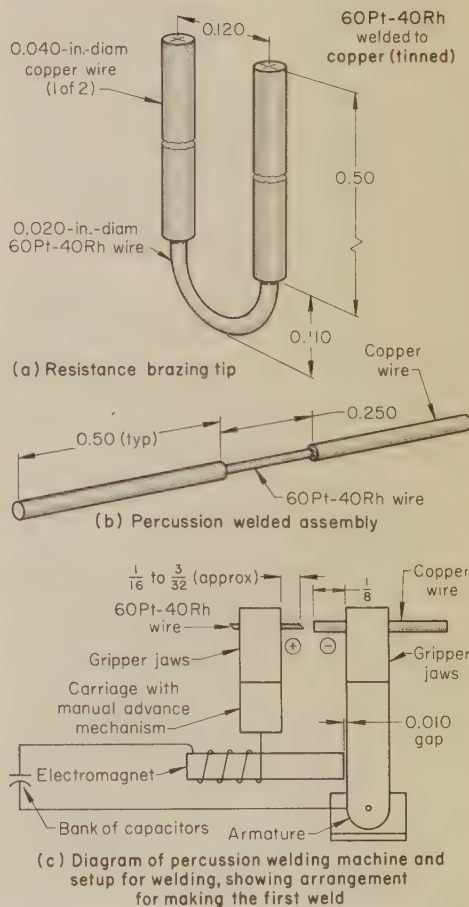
Resistance brazing tip that was formed from an assembly that had been percussion welded in the welding machine and setup shown diagrammatically (Example 177)
